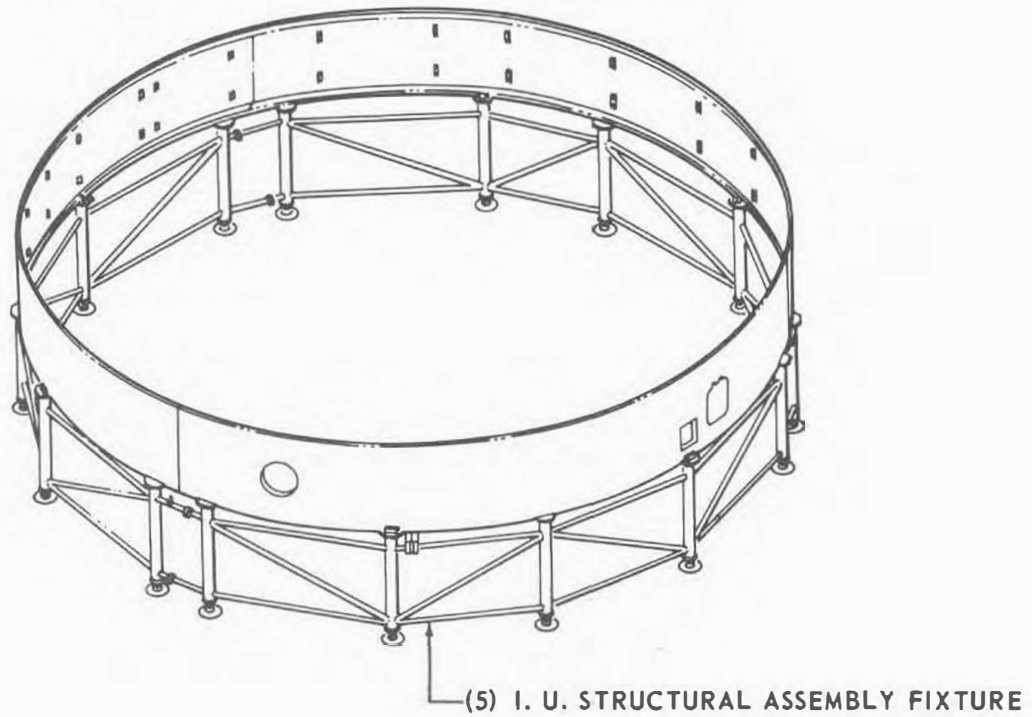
I.U. Handling and Auxiliary Equipment (Sheet 4 of 7)
